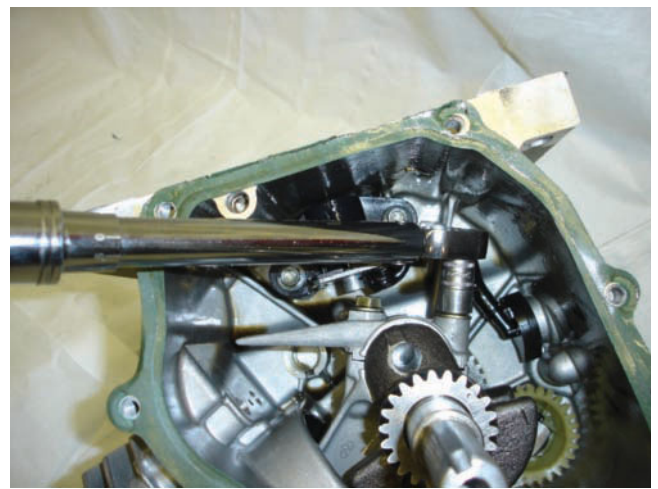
Using a torque wrench to tighten the connecting rod to the crankshaft is important.
